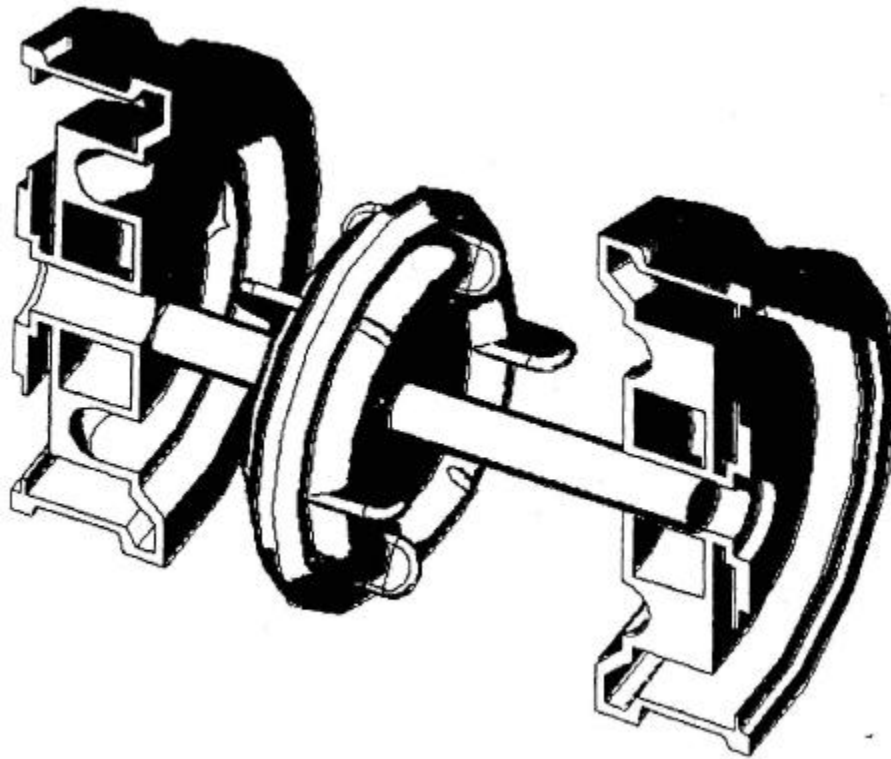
Six vane Rand Cam engine rotor/stator assembly ⁽⁷⁾
